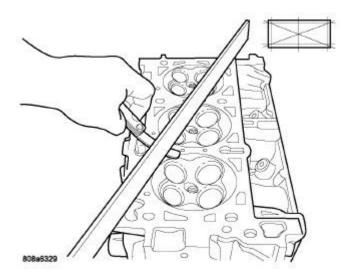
Checking Cylinder Head Flatness-Typical Courtesy of CHRYSLER LLC
